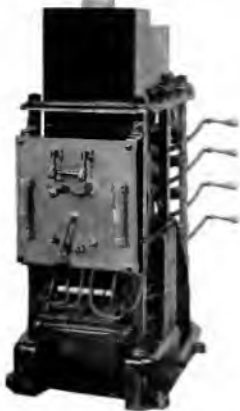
Electric Rivet Heater Rear View, Showing Switchboard Equipment
